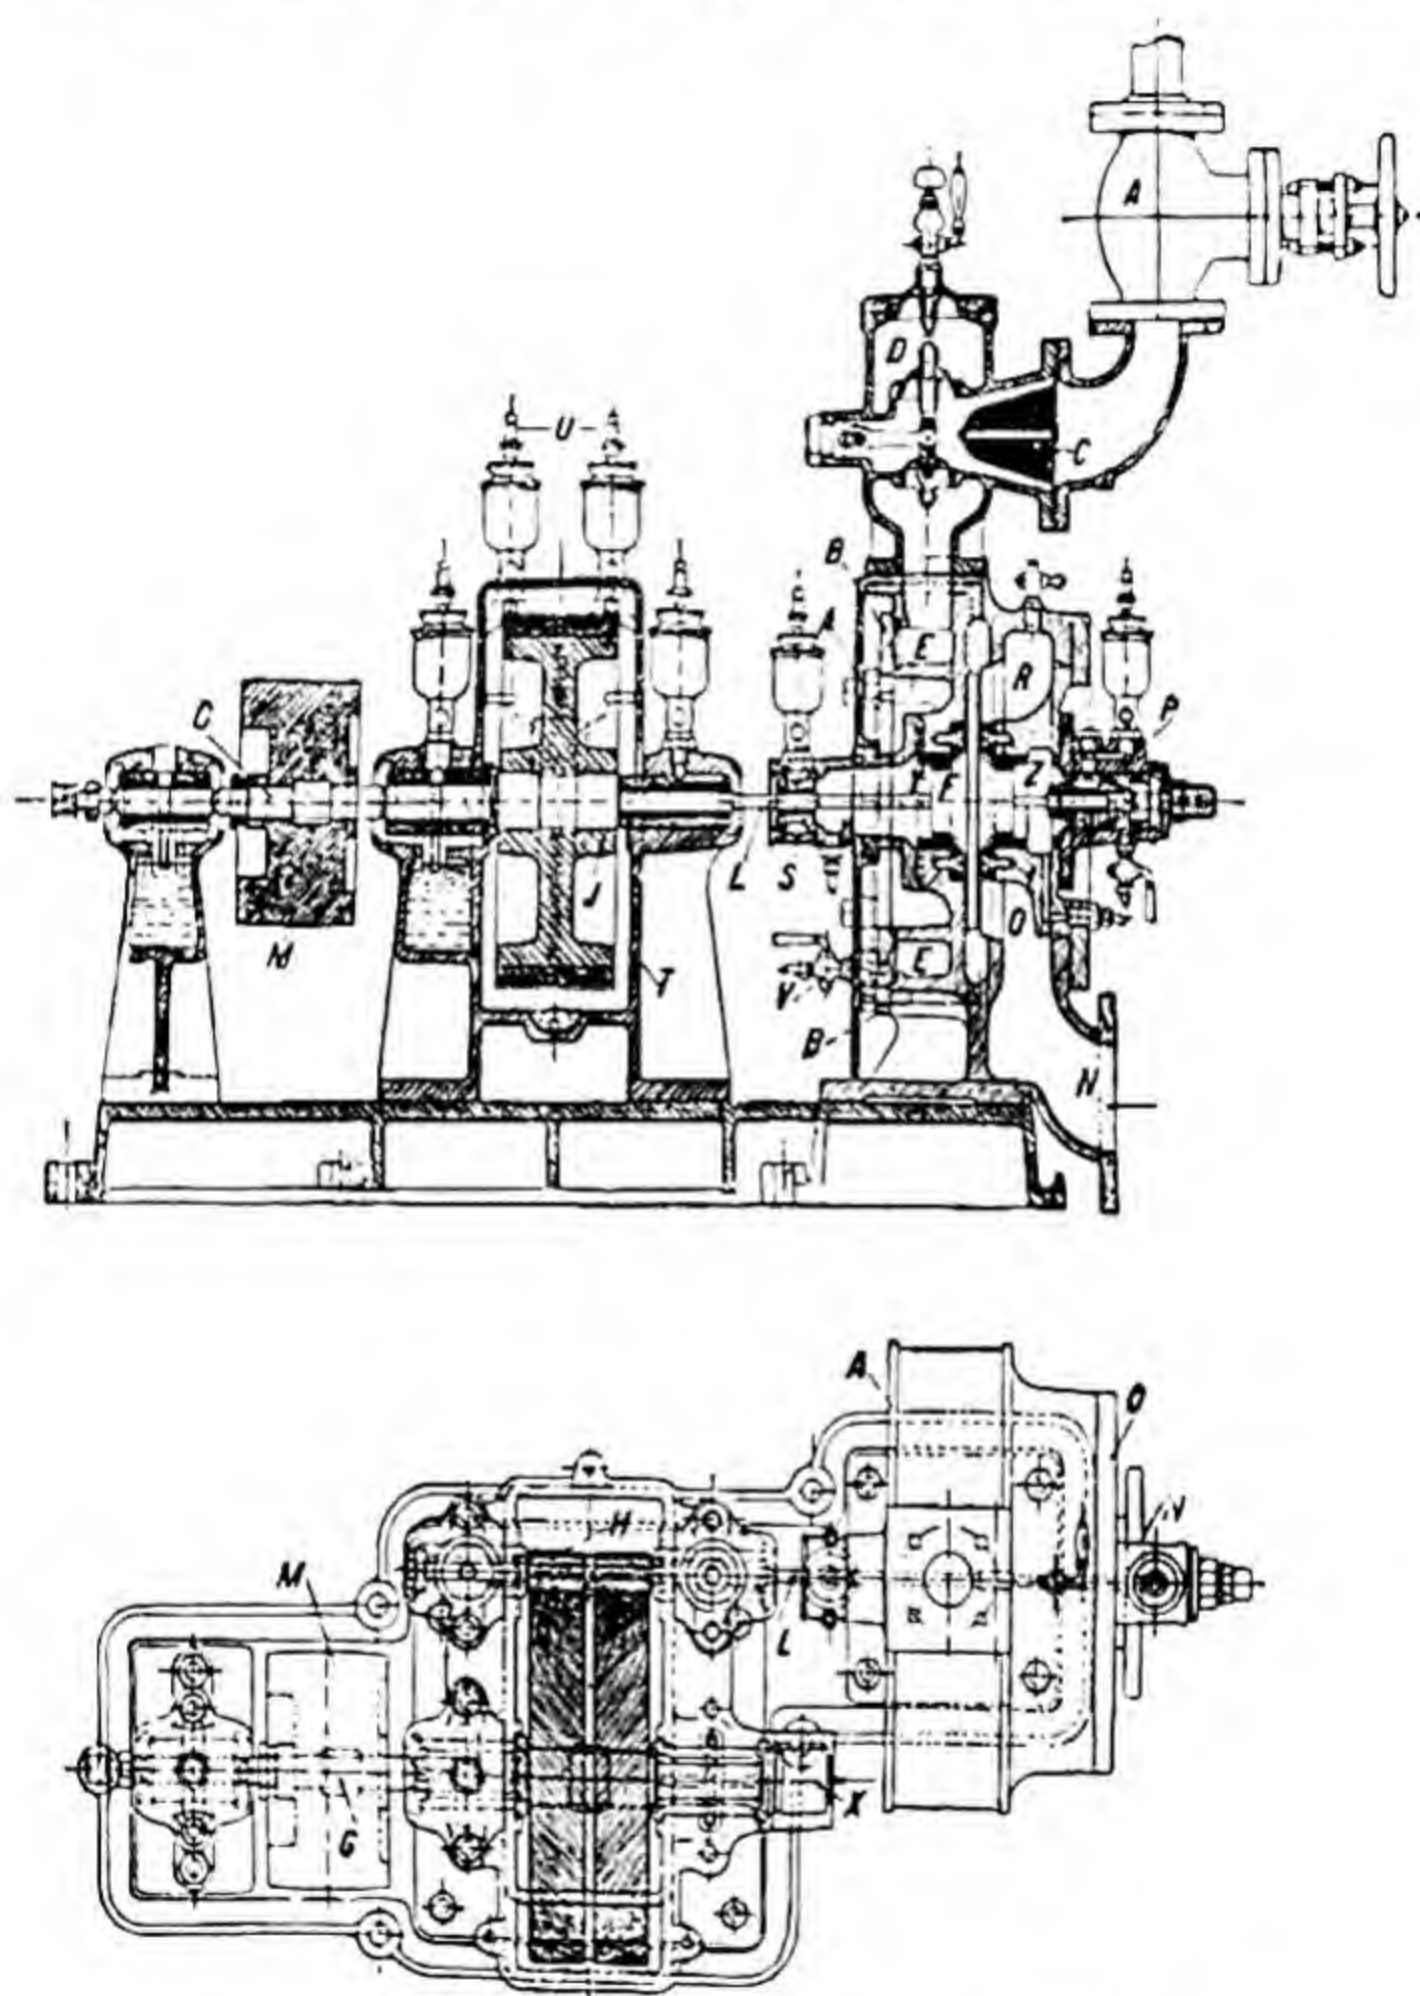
General arrangement of a 20 H.P. de Laval steam turbine.
